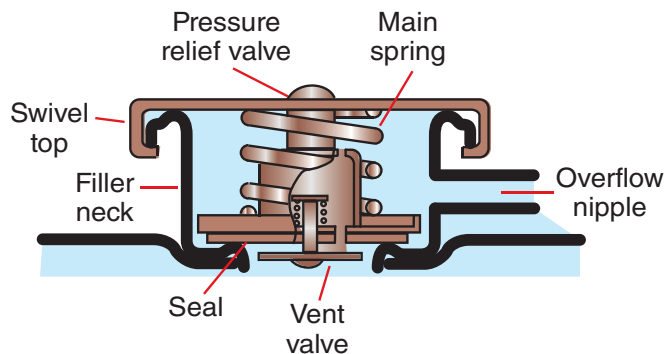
Parts of a radiator pressure cap assembly.
